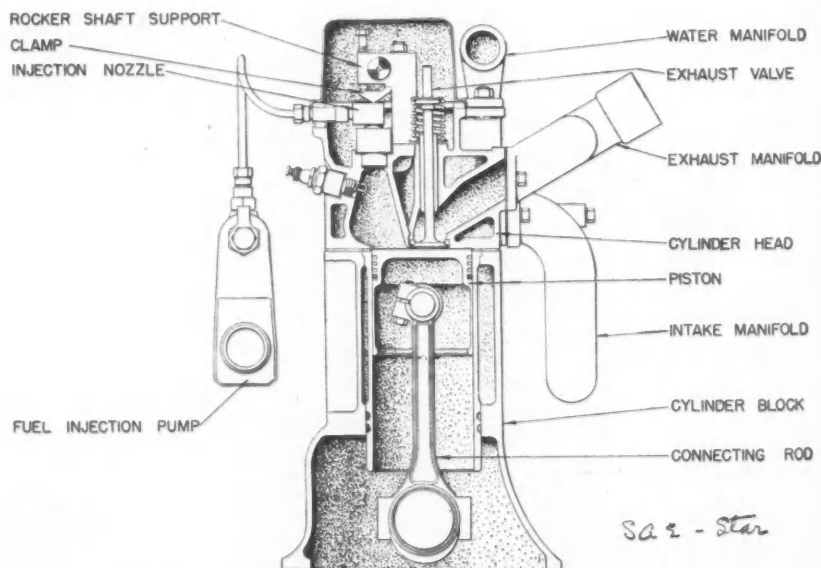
Sectional drawing of the fuel-injection spark-ignition engine.
